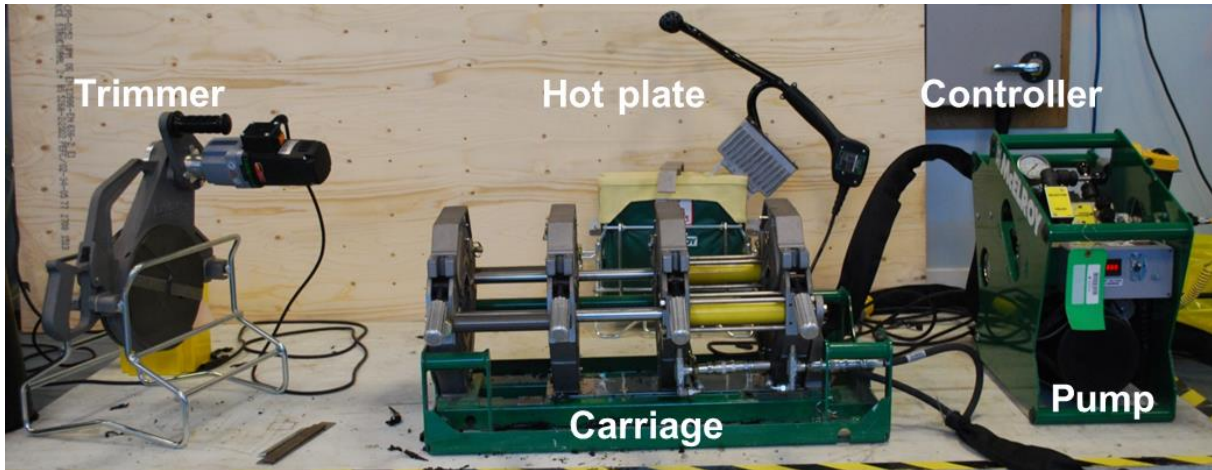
A McElroy DynaMC® 250-EP butt fusion welding machine
